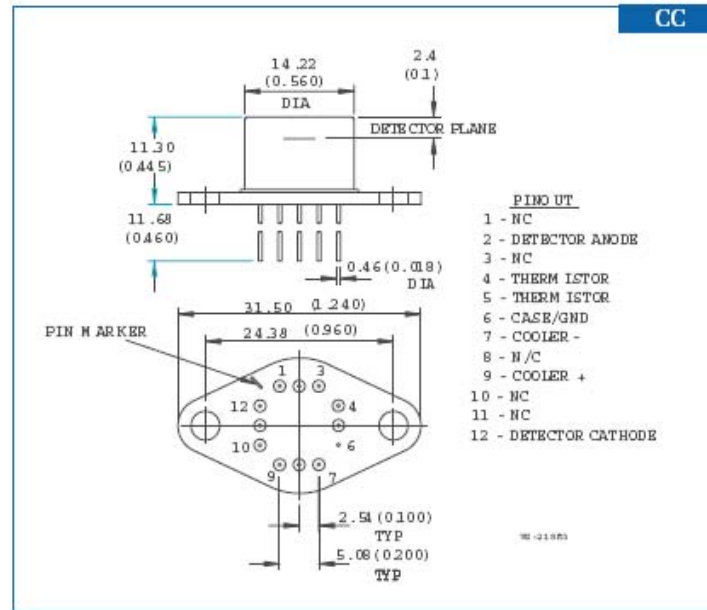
The technical drawing of the *Perkin Elmer C30902S-DTC* silicon APD.
